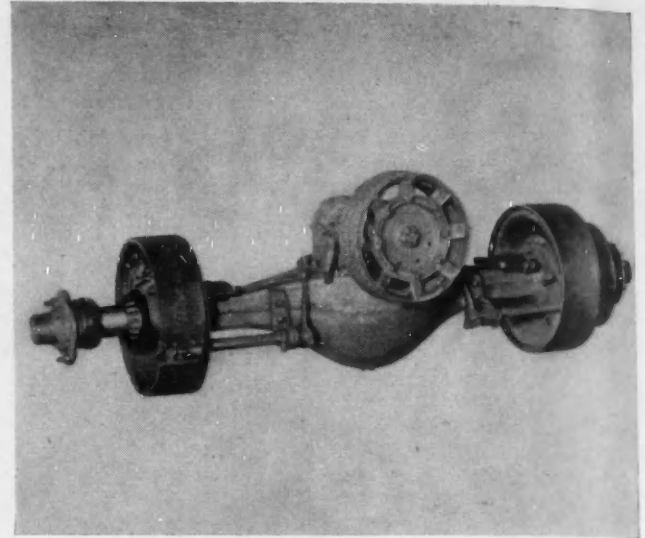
This auxiliary brake, mounted on the pinion housing of the rear axle, imposes high stresses on some parts of the drive system, but not on the propeller shaft and universal joints, as does the arrangement in Fig. 3
